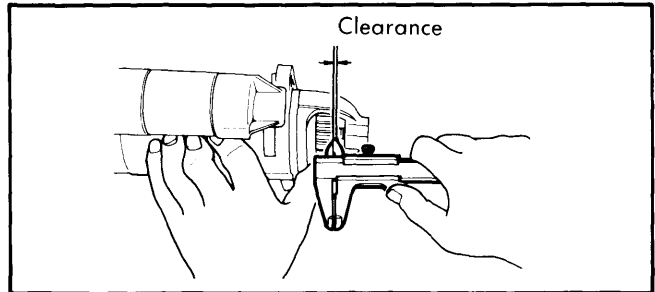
Measuring Pinion Edge-to-Pinion Stopper Clearance
